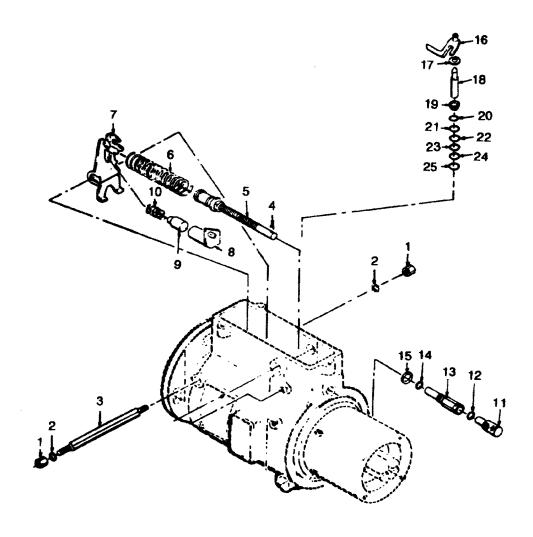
Fuel injection pump, pivot shaft and arm assembly.
